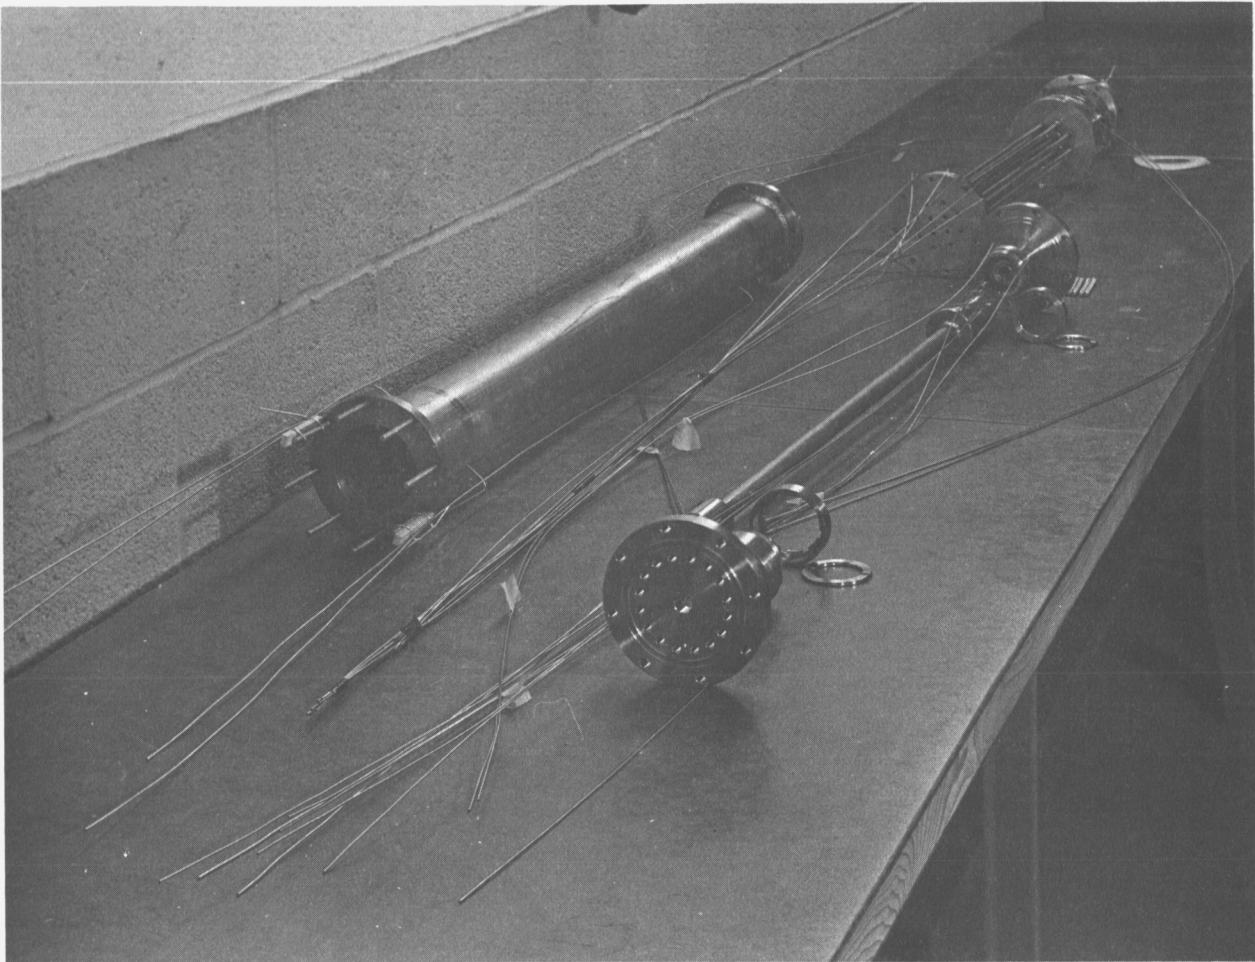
1 Control Drum-Drive Shaft Assembly - Discharge Side
